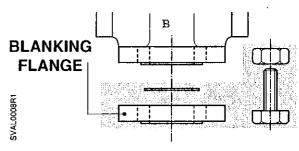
MXF461...U Flanged Valves in Straight-through Applications.
